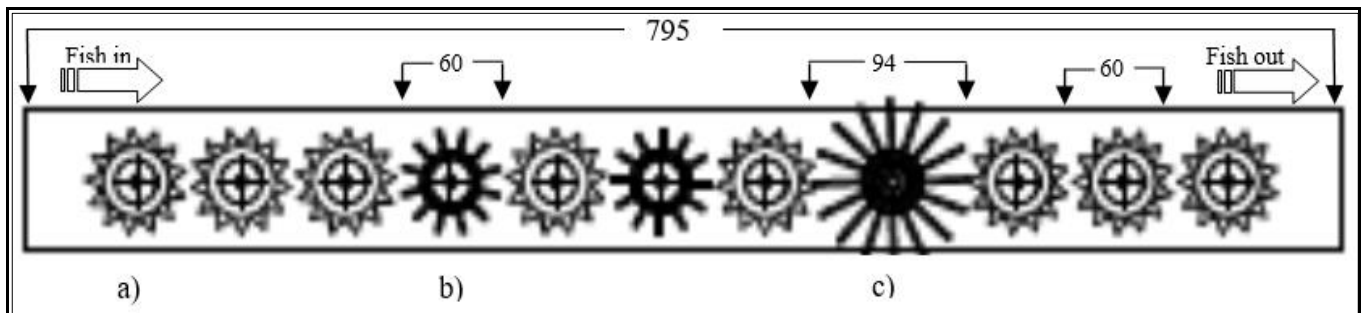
Schematic diagram of scalp roller assembly front view a) Conveyor rollers (8 Nos.), b) Primary descaling rollers (2 Nos.), Secondary descaling roller (1 No.), (All dimensions are in mm)
